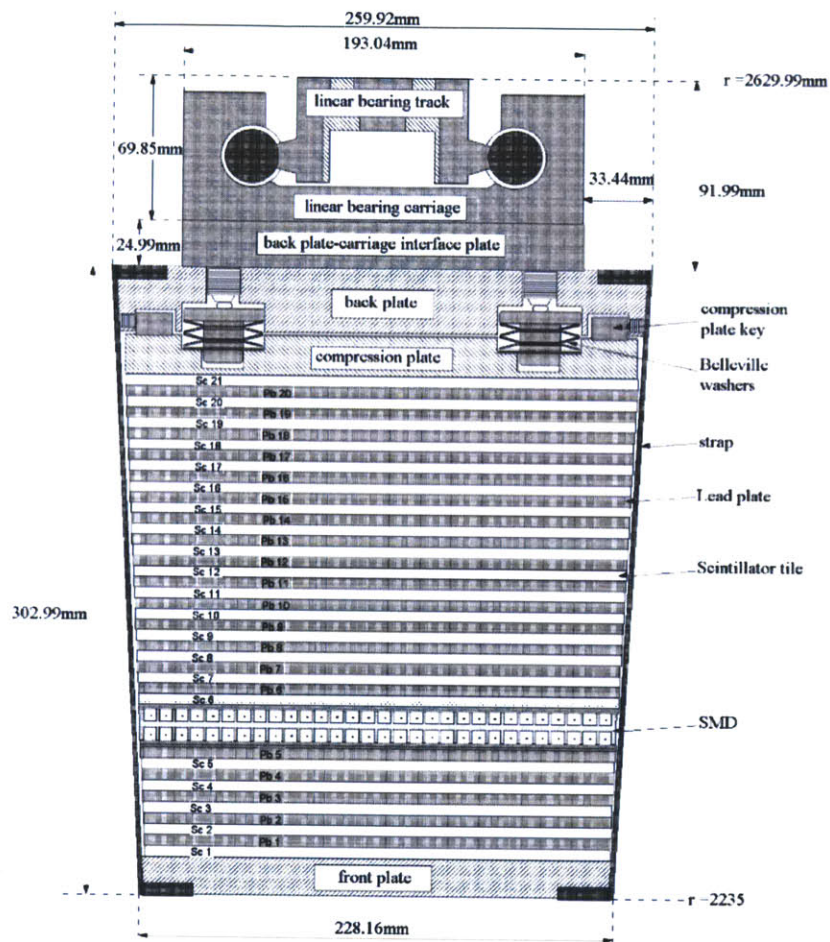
A cross section of a BEMC module showing the mechanical assembly of a tower including the compression components and the location of the shower maximum detector.
